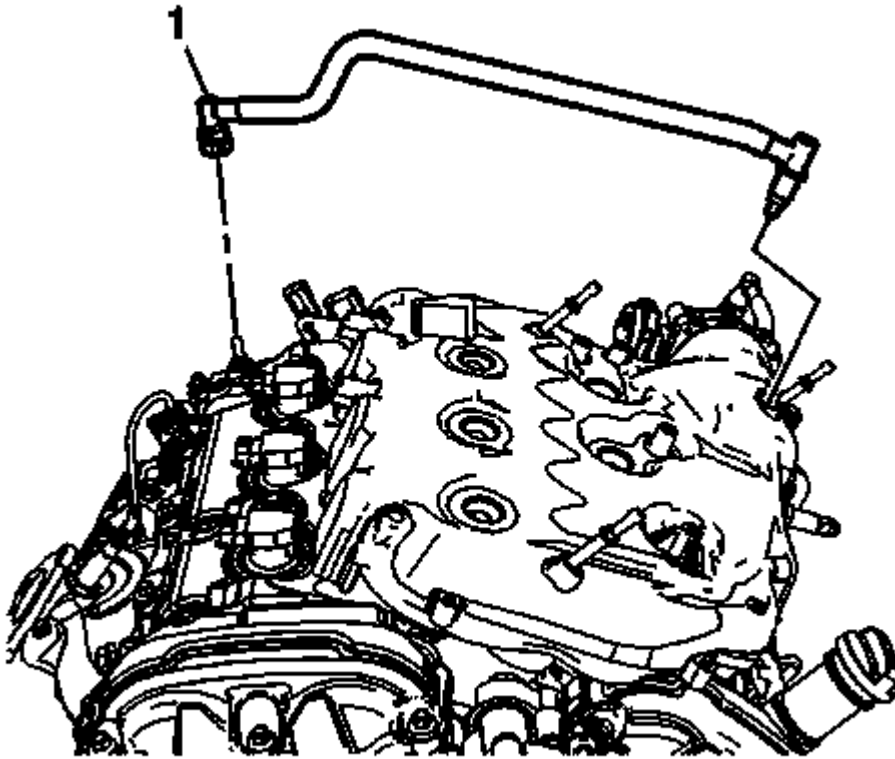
View Of Rear Positive Crankcase Ventilation Tube
